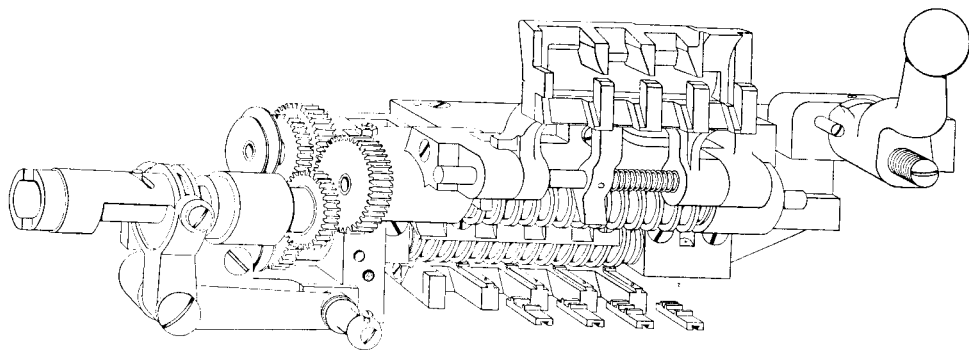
Distributing mechanism; primary distributor assembled.
